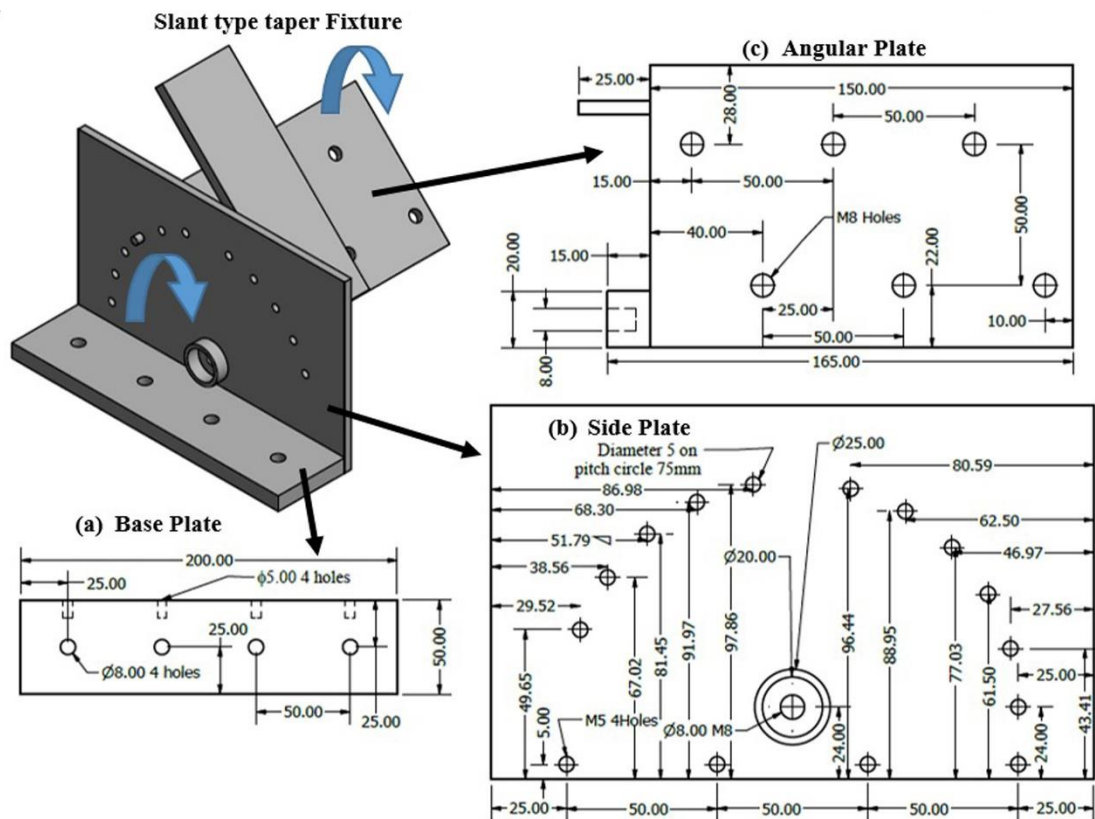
Slant type taper Fixture part specification (Manoj et al., Copyrights: Diary Number: 2378/2019-CO/L., Reg. No: L-81981/2019)
